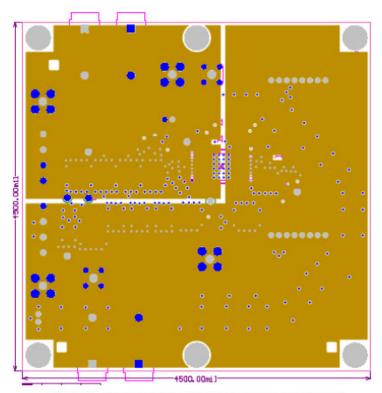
Board Layout - Second Layer (Mid Layer 1)
